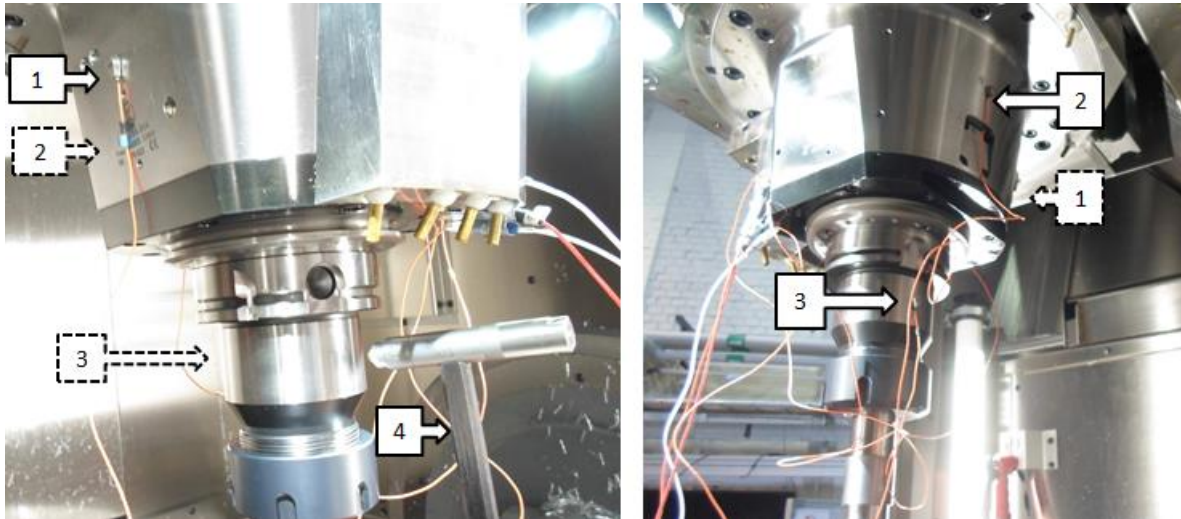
Setup 3 (1) Accelerometer in spindle housing x axis. (2) Accelerometer in spindle housing y axis. (3) Accelerometer in tool holder y axis. (4) Impact hammer.
